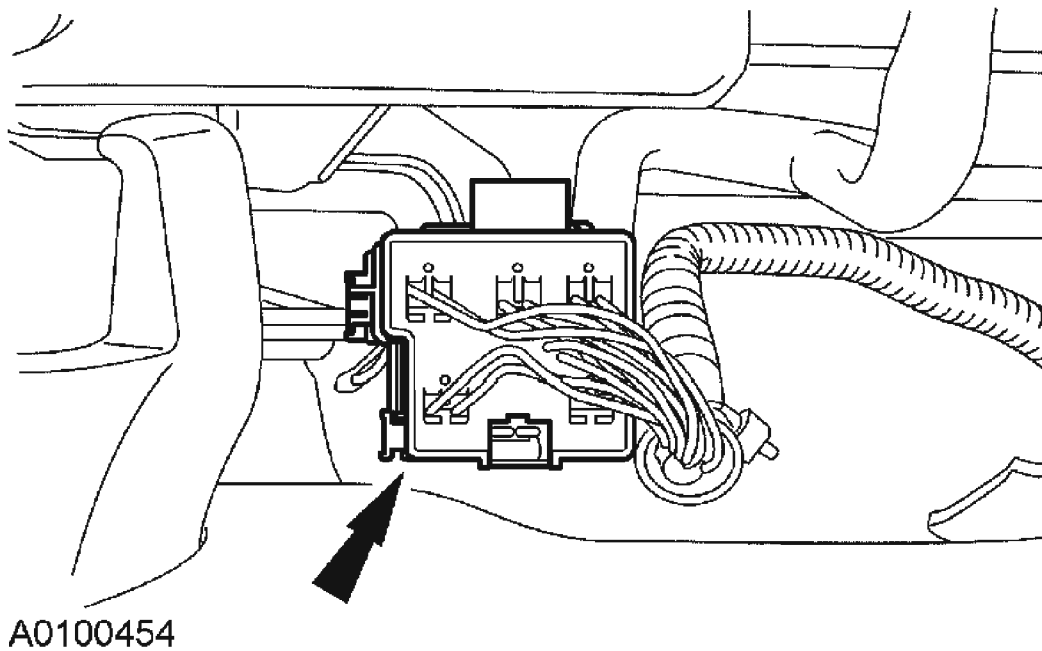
Disconnecting Passenger Seat Electrical Connector Located Under Seat
